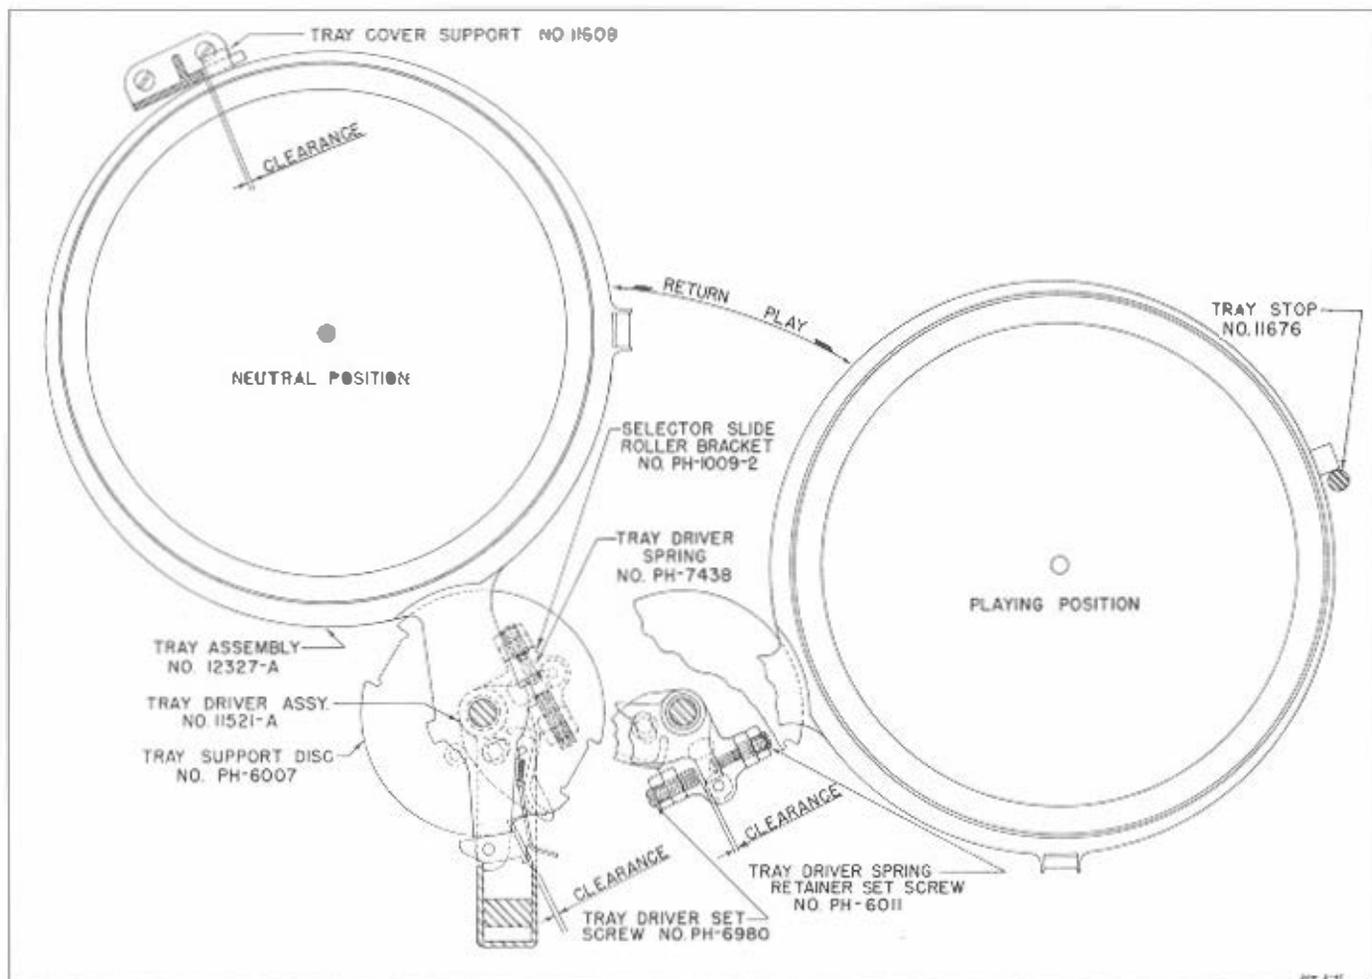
Tray Stack and Driver (Schematic Drawing)
